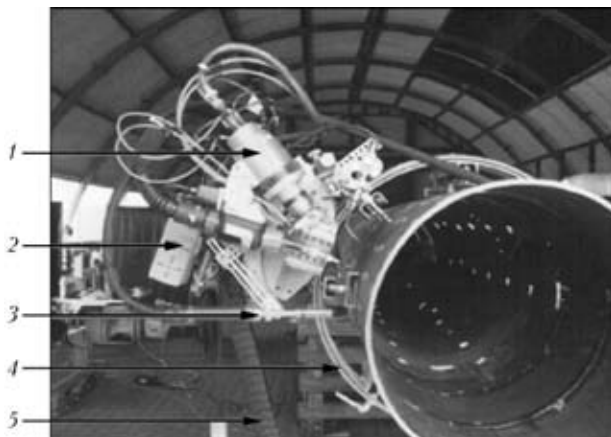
Welding complex for hybrid laser welding: *1* – head for hybrid welding; *2* – moving tractor with control sensor; *3* – torch in the position of groove filling; *4* – ring; *5* – hose
